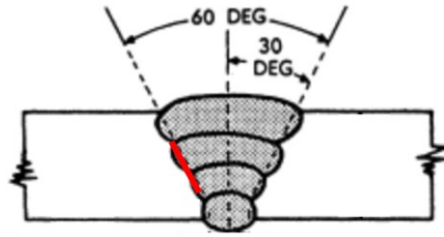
Illustration of a 60° “V” groove weld modified from [111]. The sought penny-shaped crack is indicated by a red line.
